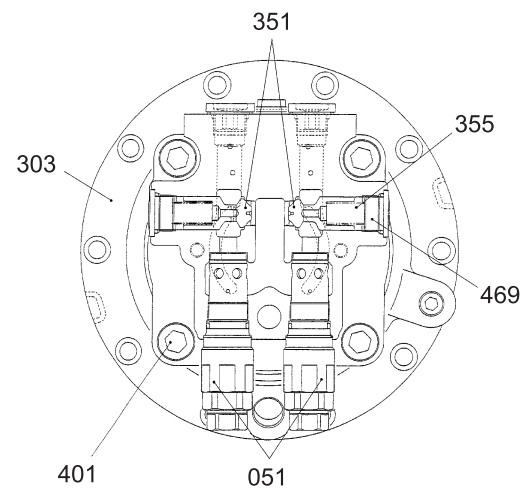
Removing relief valve (651), anti-reaction valve (052), anti-cavitation plunger (351) and valve casing (303)
